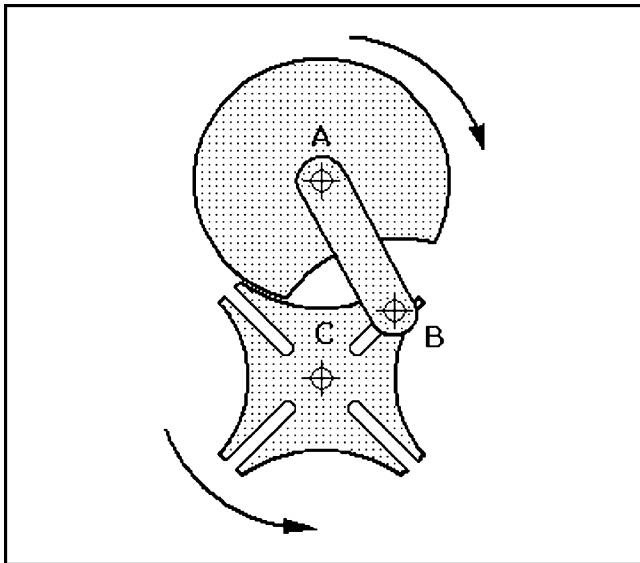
Geneva wheel escapement mechanism: Pin B at the end of lever AB (attached to wheel A) engages a slot in geneva wheel C as wheel A rotates clockwise. Pin B moves down the slot, providing torque to drive the geneva wheel counterclockwise $\frac{1}{4}$ revolution before it exits the first slot; it then engages the next three slots to drive the geneva wheel through one complete counterclockwise revolution.
